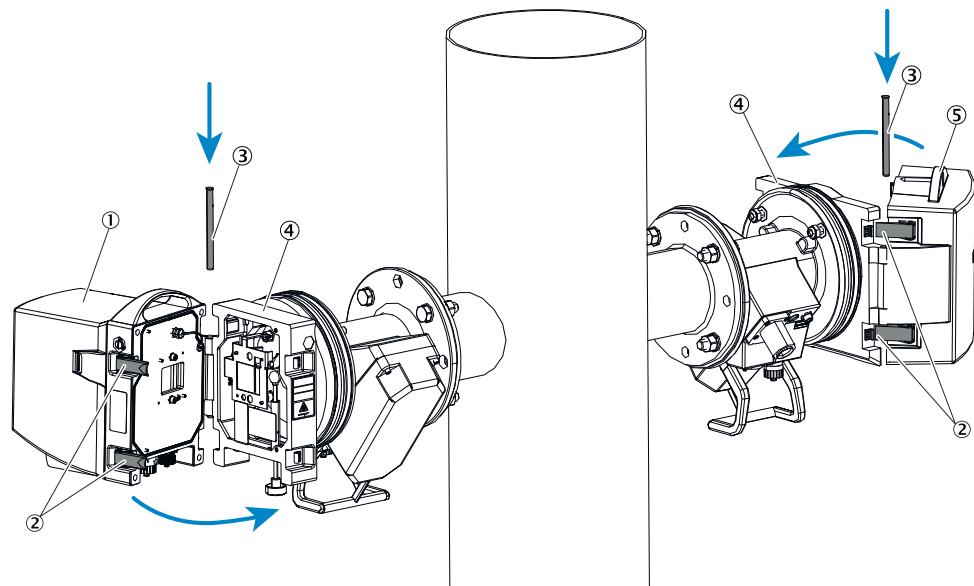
Fitting the sender/receiver unit and reflector unit on the flange fixture
